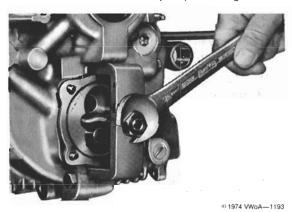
Puller being used to remove oil pump housing from crankcase.
